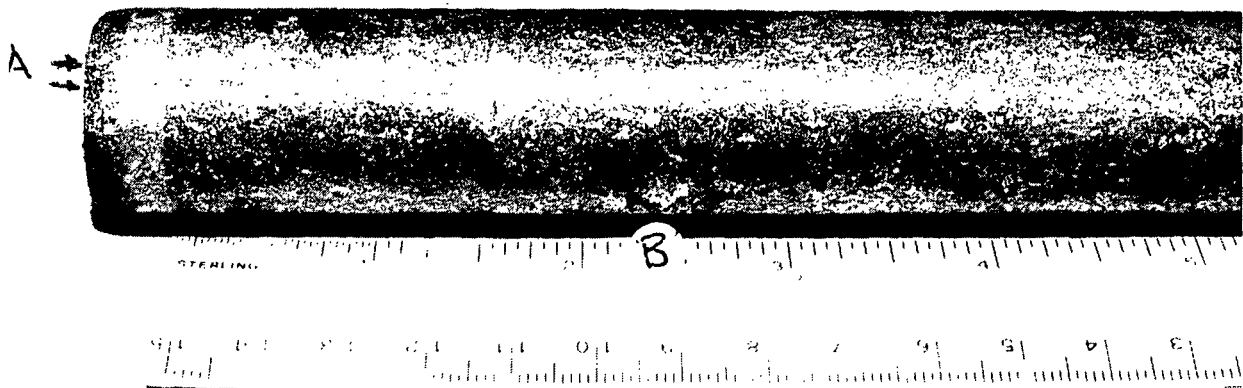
Close-up Photograph of Stress Corrosion Cracking and Pitting at Locations A and B, Respectively, in the Straight Section of Tube (Figure 8)
